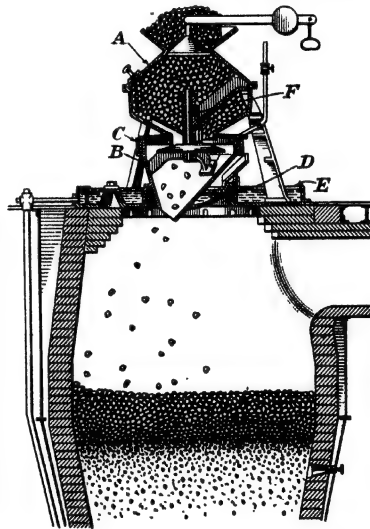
GEORGE MECHANICAL FUEL DISTRIBUTOR.
